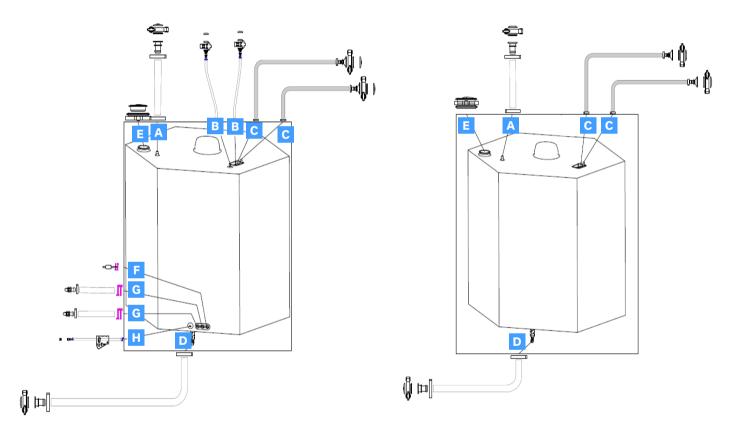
Single-use biocontainer configurations. General-use design (left) and standard design (right).
